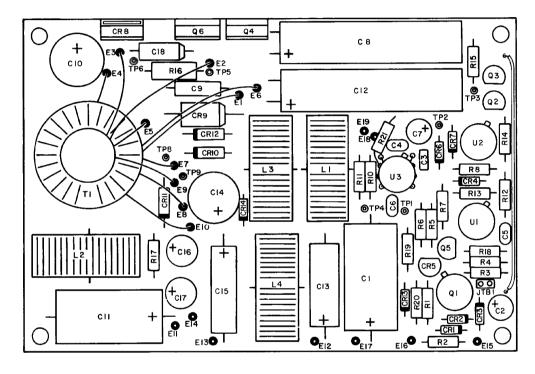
Motherboard PC Board Assembly (0000-5510-000-C)
